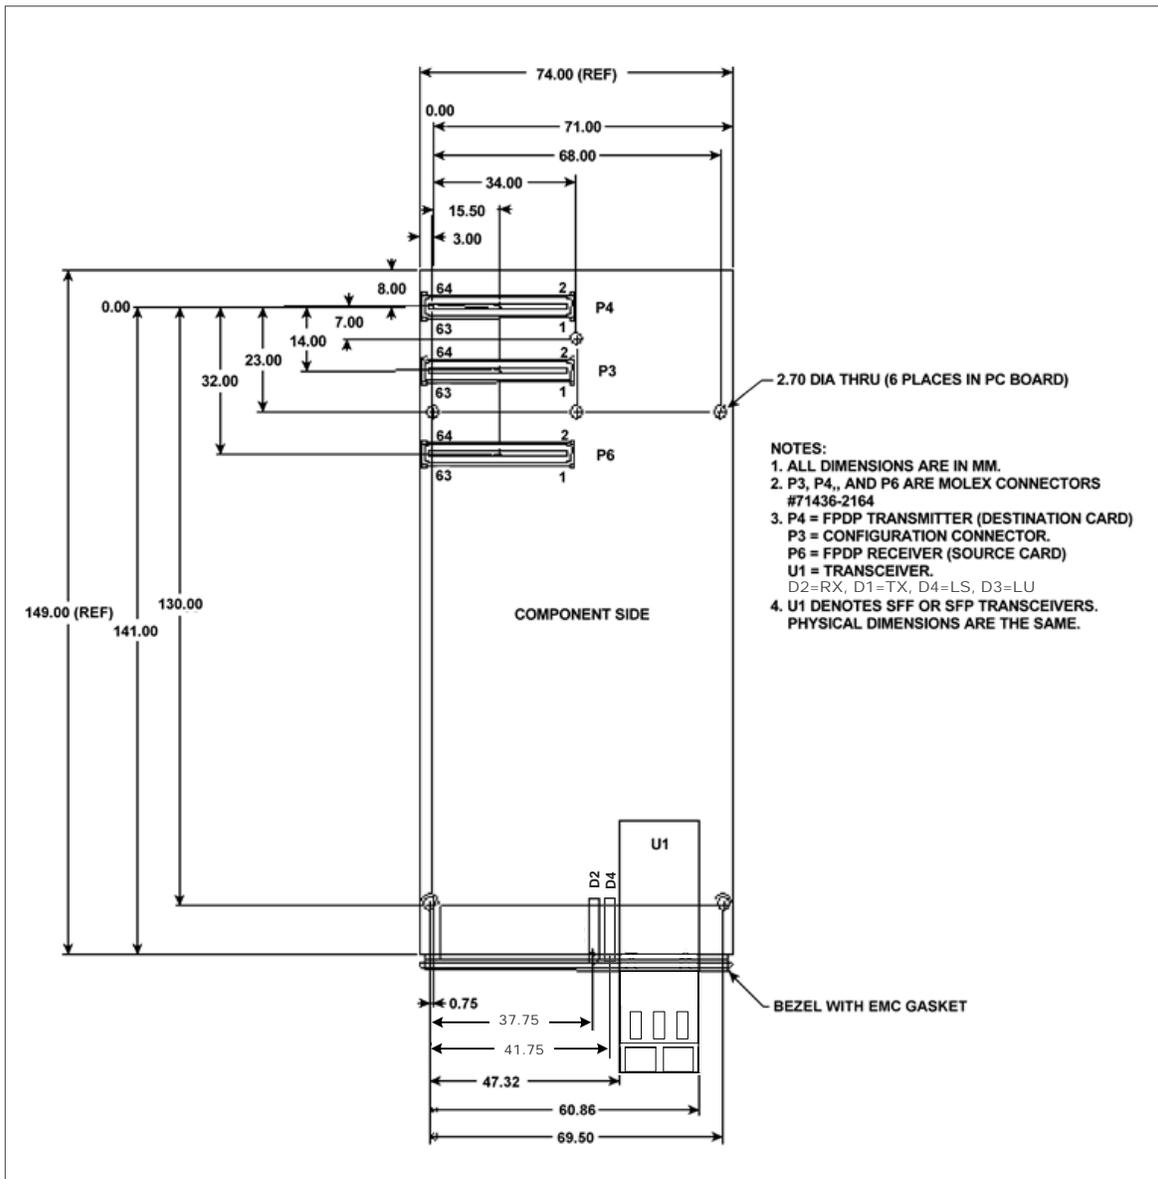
SL240 Rehostable CMC FPDP Card Dimensions
